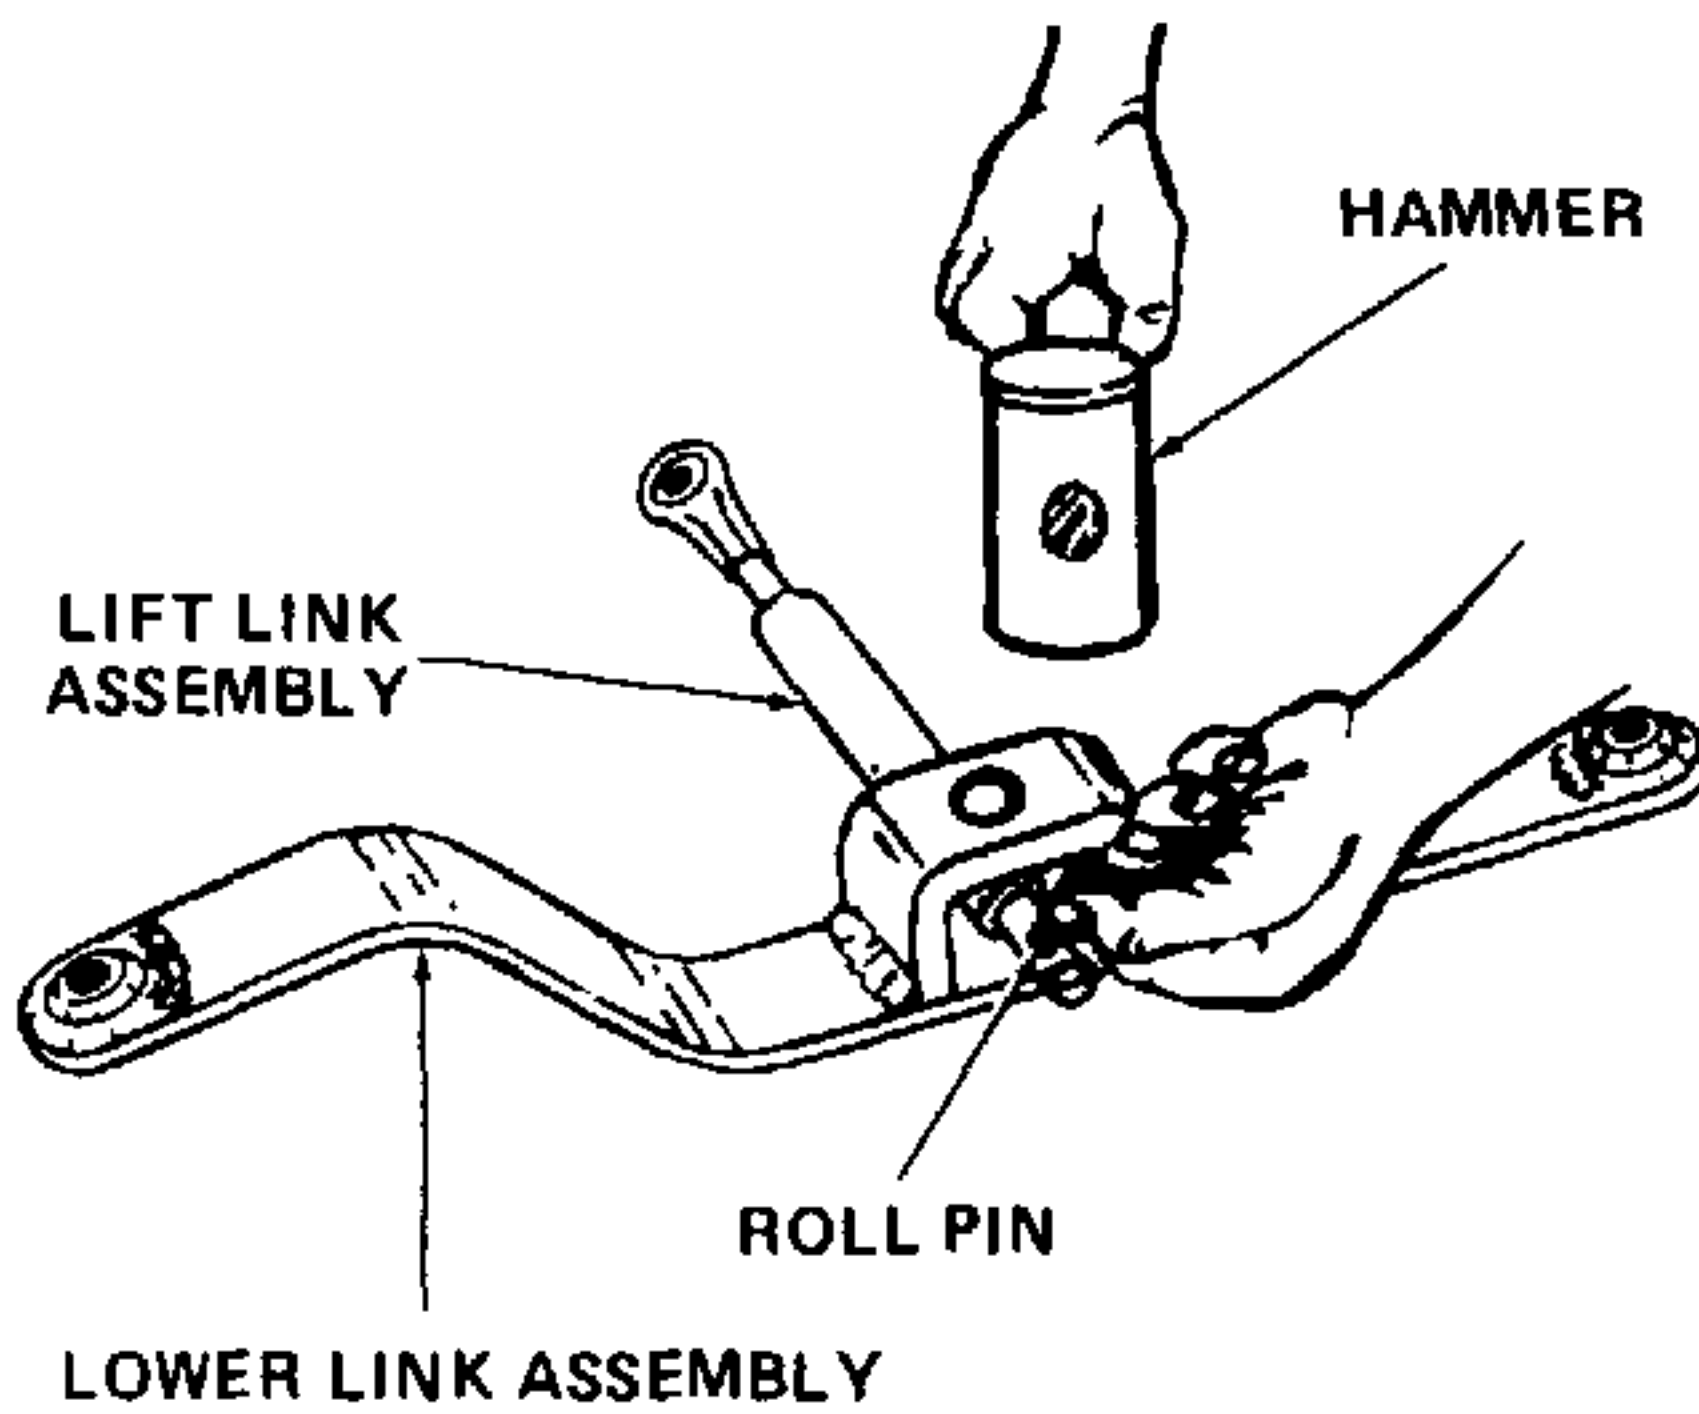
Installing Lift Link Assembly into Lower Link Assembly.
